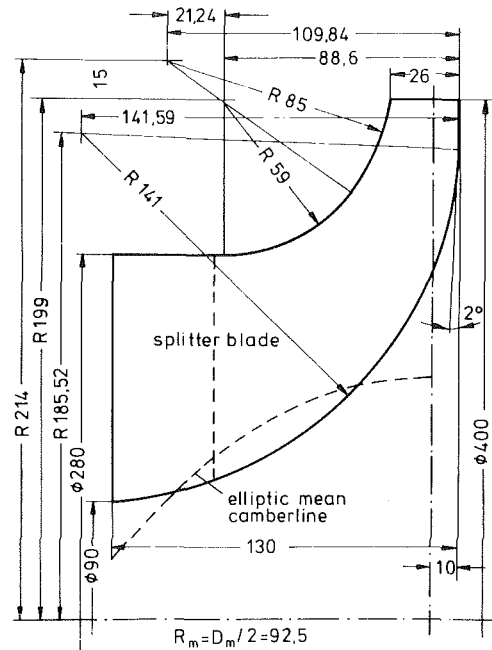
Meridional geometry and blade camberline shape of the radial discharge impeller
